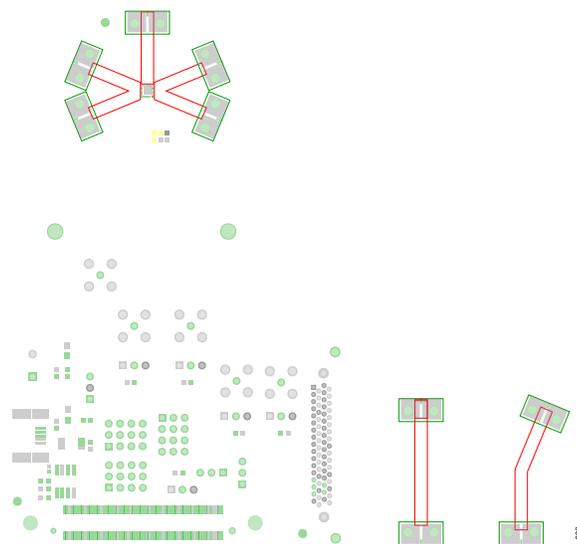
EVAL-ADGM3144SDZ Soldermask Top
